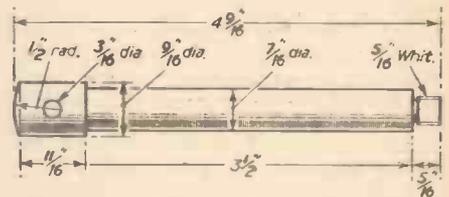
The main spindle, showing the hole for tommy bar, and threaded end for cutter.
